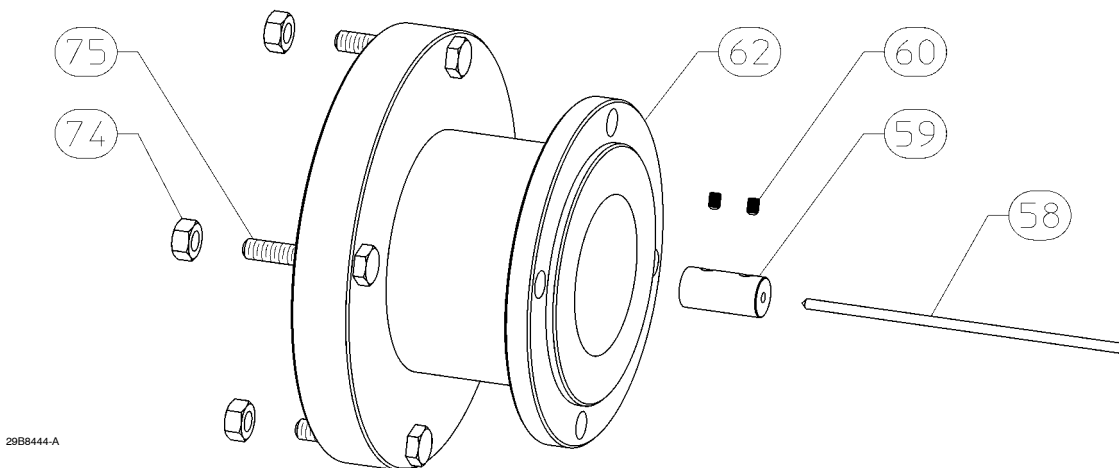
Mounting Kit for Masoneilan® 12200 and 12300 Sensor without Heat Insulator
